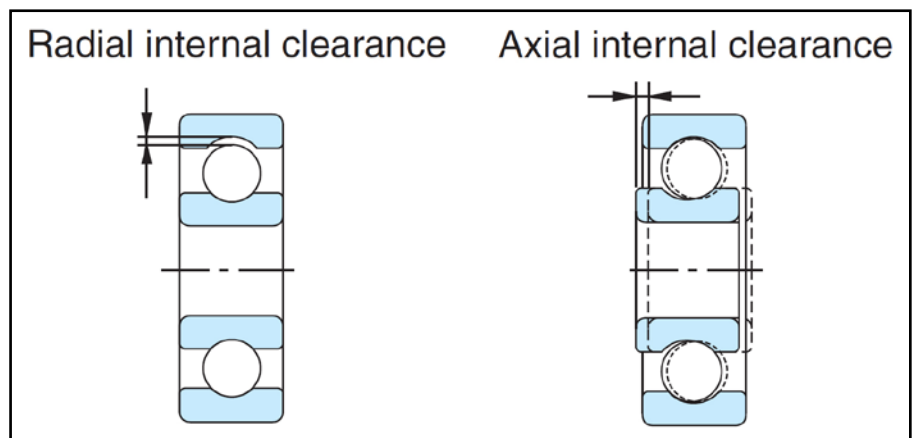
Distinguishing bearing radial internal clearance from preload tapered bearings (axial preload/endplay).
